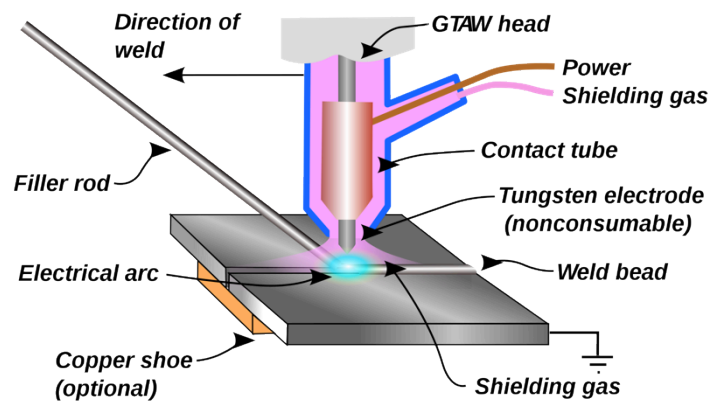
Different elements in a standard TIG welding (*Gas Tungsten Arc Welding 2014*)
